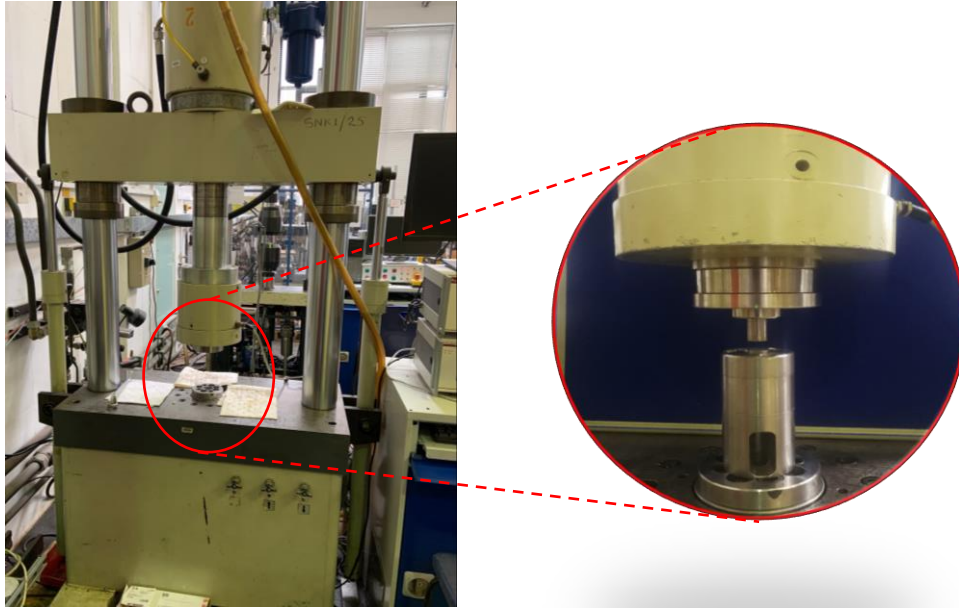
Experimental setup of the extrusion process using a hydraulic machine.
